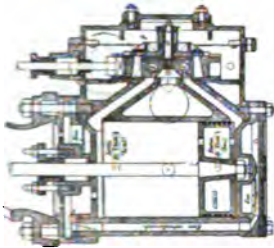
SECTION OF AIR-COMPRESSOR WITH MEYER SLIDE VALVE.
